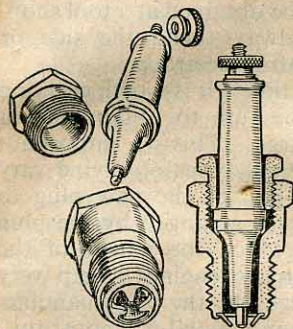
Part-sectional drawing of the Lodge sparking plug fitted to Villiers autocycle units
